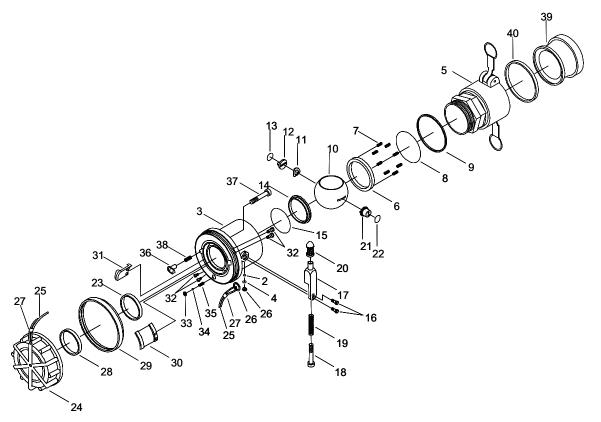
2 In. Female Quick Disconnect x 2 In. Valved Dry-Break Adapter Assembly.
